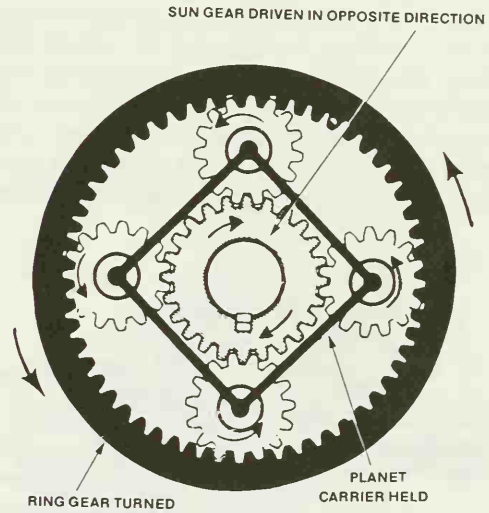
With the ring gear as input and the planet carrier held, the sun gear turns in the opposite direction at an overdrive. (Chevrolet Motor Division of General Motors Corporation)
